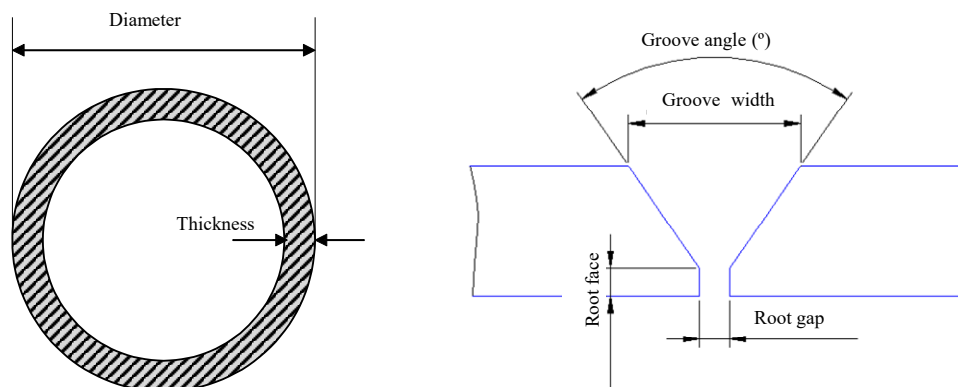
Schematic figure (geometrical information of the test pipe) and shape of welding groove
